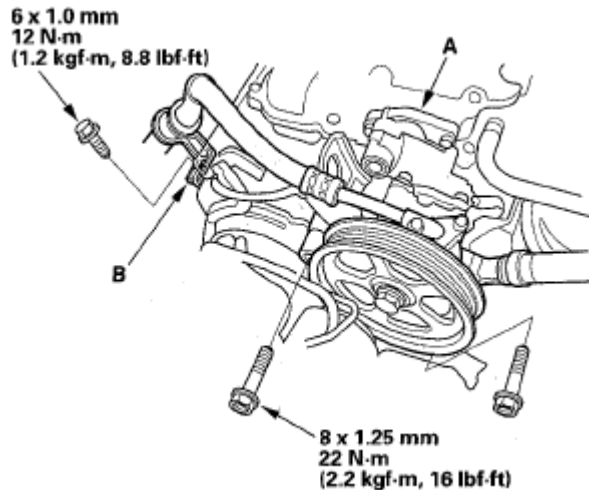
Identifying Power Steering (P/S) Pump And P/S Hose Bracket Bolts With Torque Specifications
